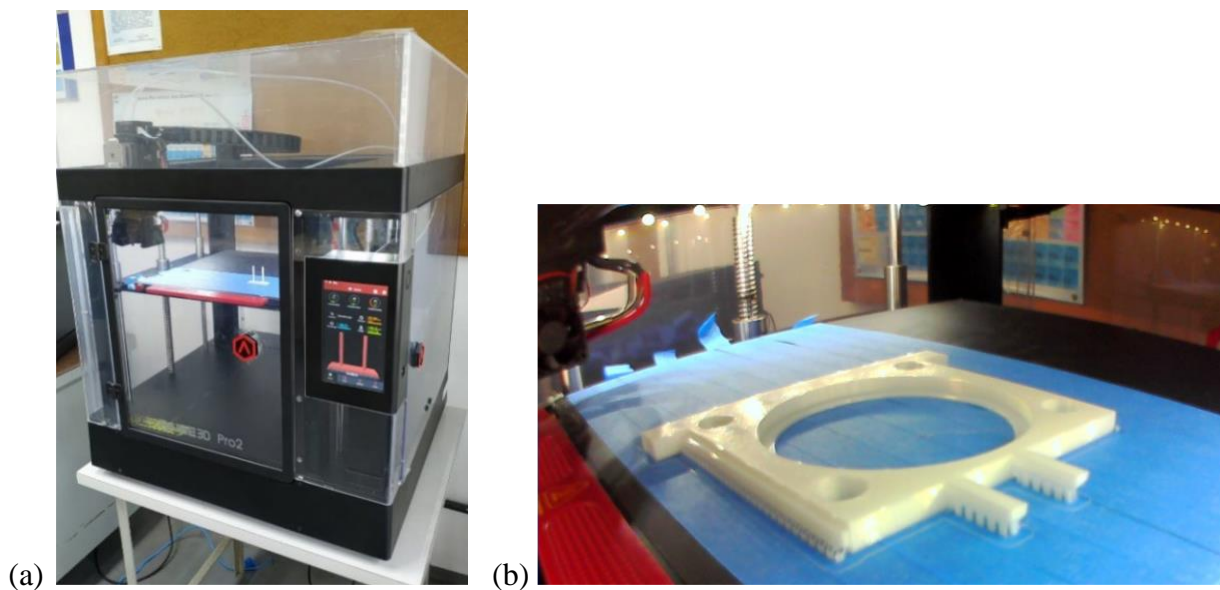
(a) image of the FDM 3D printer (Raise3D PRO [8]), (b) and a drawer being printed.
